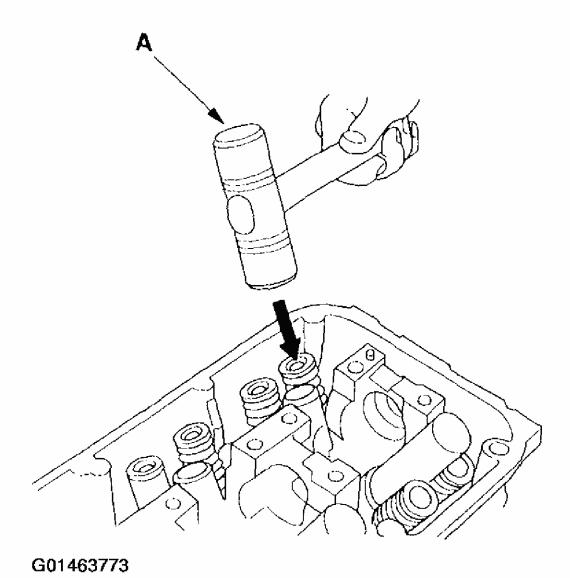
Ensuring Proper Seating Of Valve & Valve Keepers Courtesy of AMERICAN HONDA MOTOR CO., INC.
